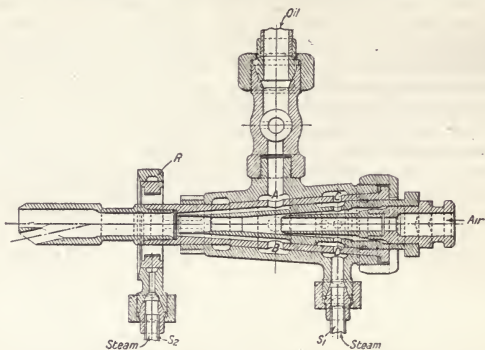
SECTIONAL PLAN OF HOLDEN BURNER.
